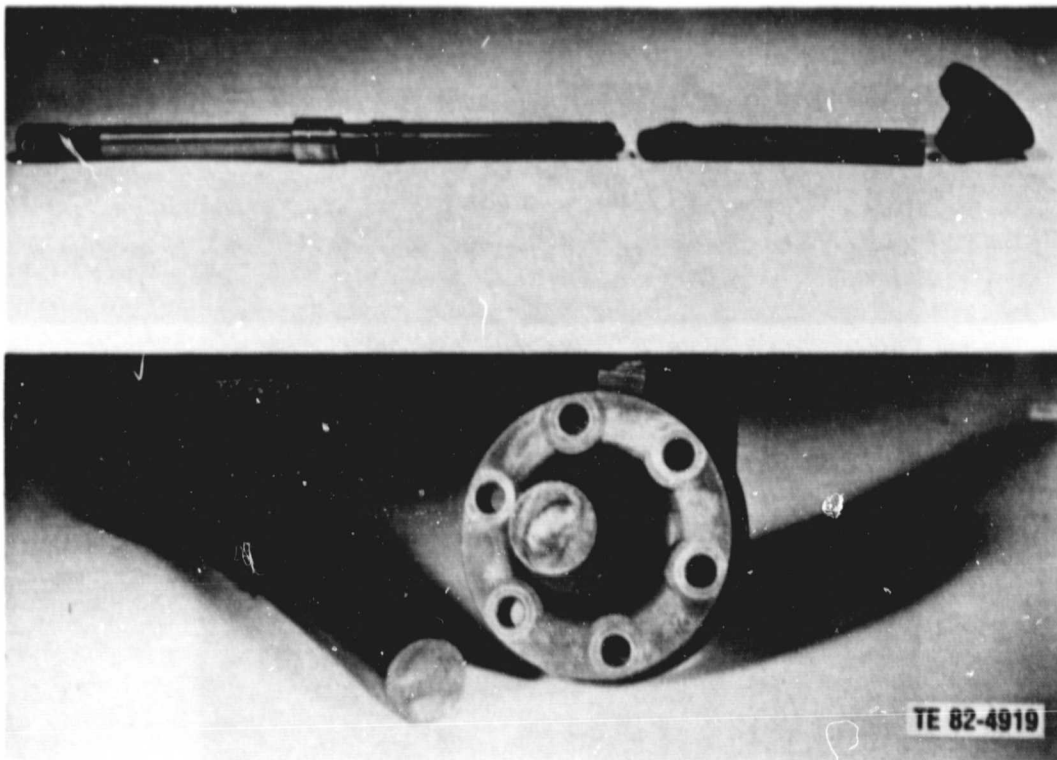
Gasifier quill shaft from Greyhound engine S/N T5 showing central rubbing failure and secondary fracture near flange (508 total engine hours).
